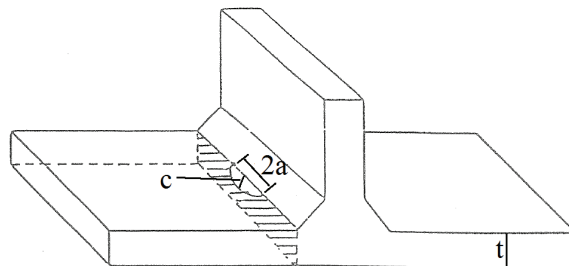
Typical semi-elliptical surface crack on weld toe of fillet weld joint.
